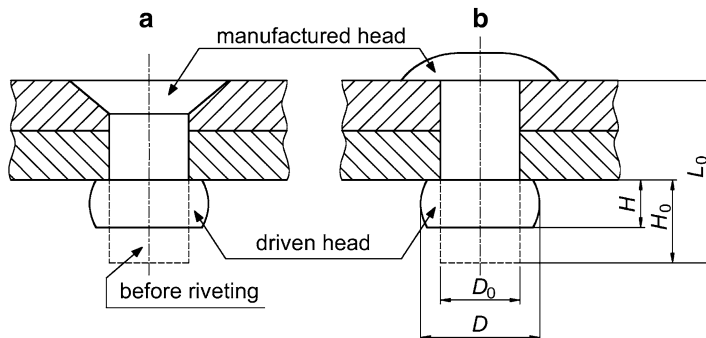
Rivet dimensions before and after riveting: (a) countersunk rivet; (b) protruding head rivet
